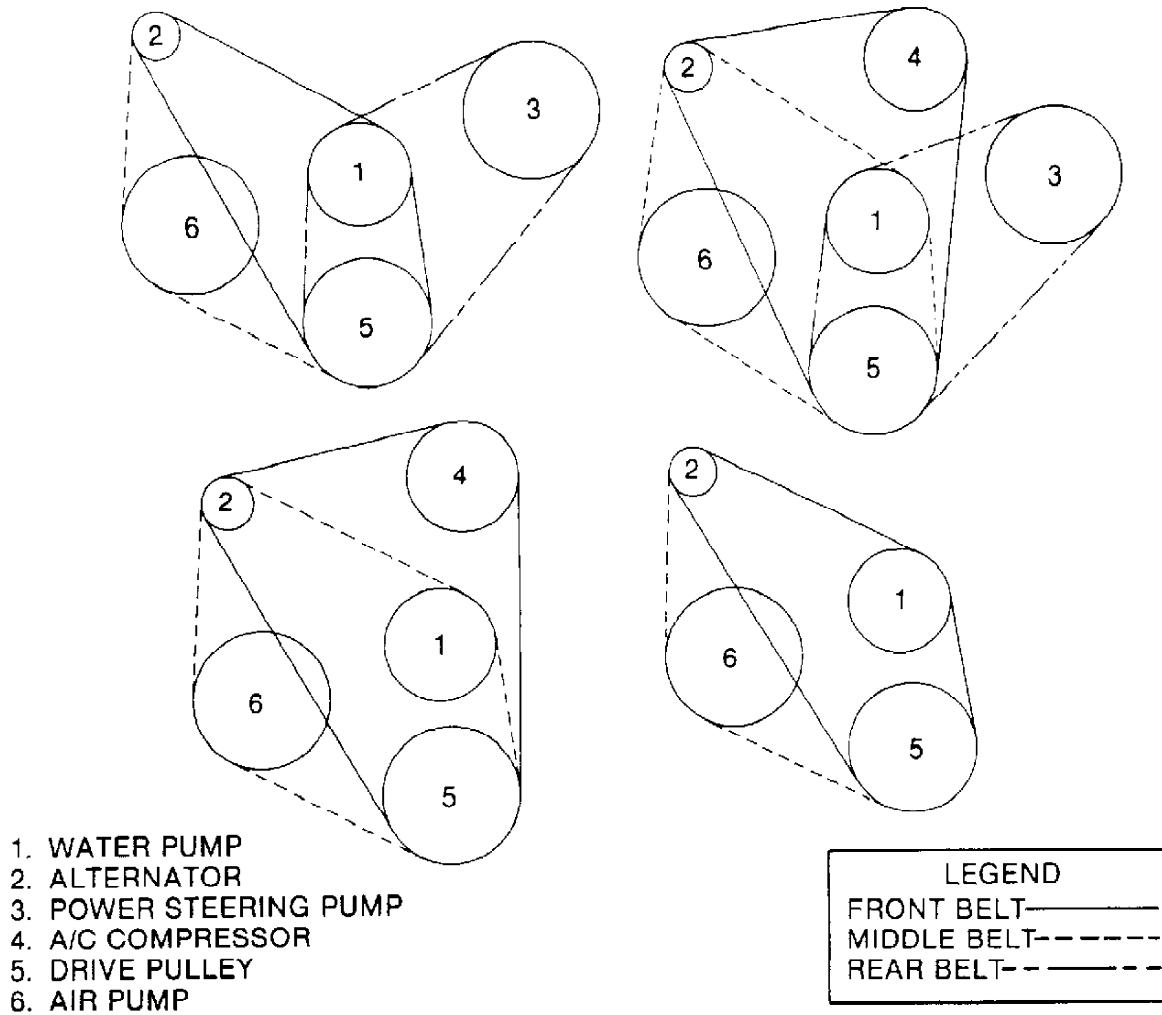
Drive Belt Arrangement: 1983-86 4.2L Wrangler
